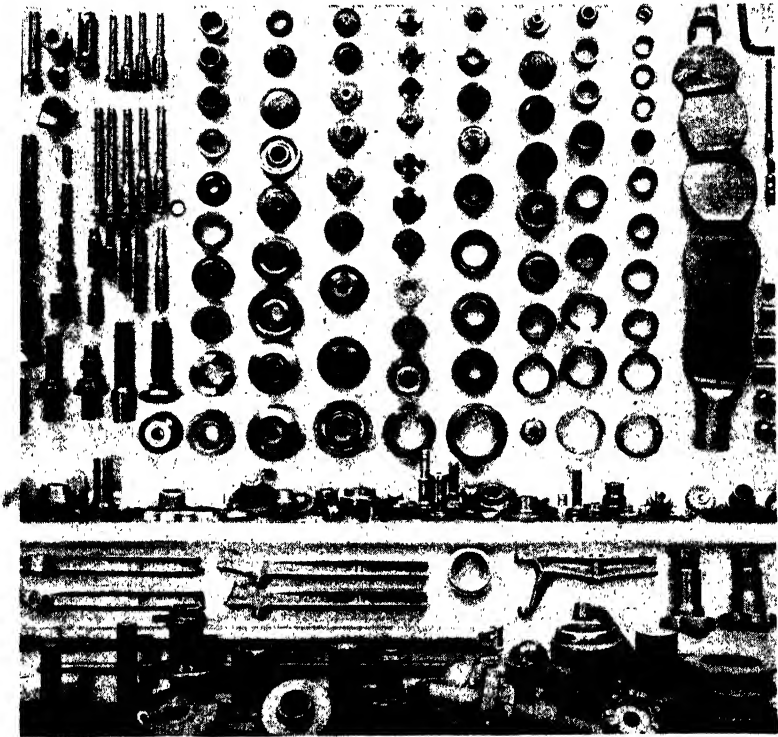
Typical upset and pierced die forgings. (Courtesy of National Machinery Company.)
